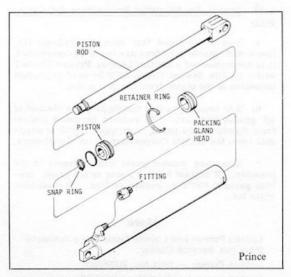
Tailgate Lift Cylinder Disassembly Date 9-1-77
